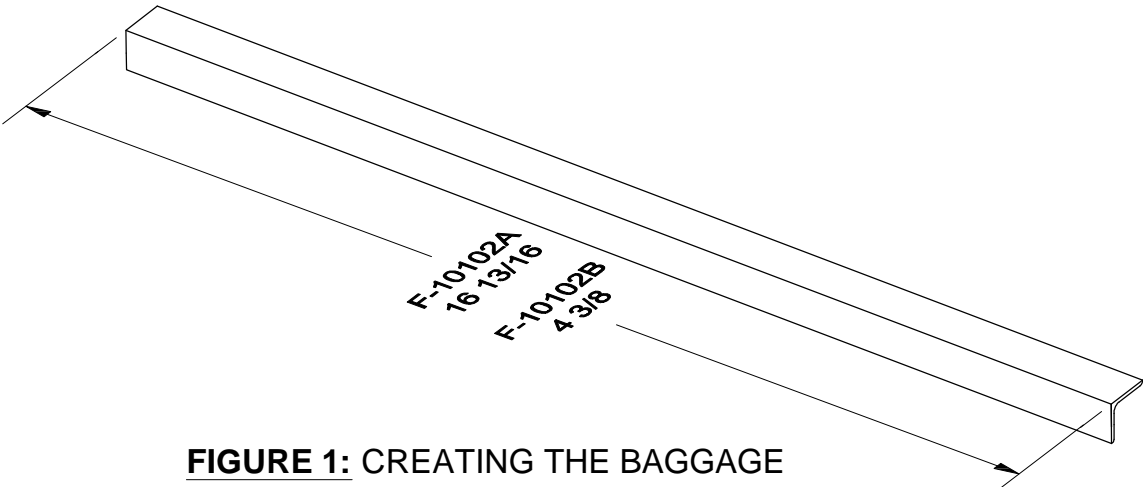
CREATING THE BAGGAGE DOOR SEAL ANGLES
